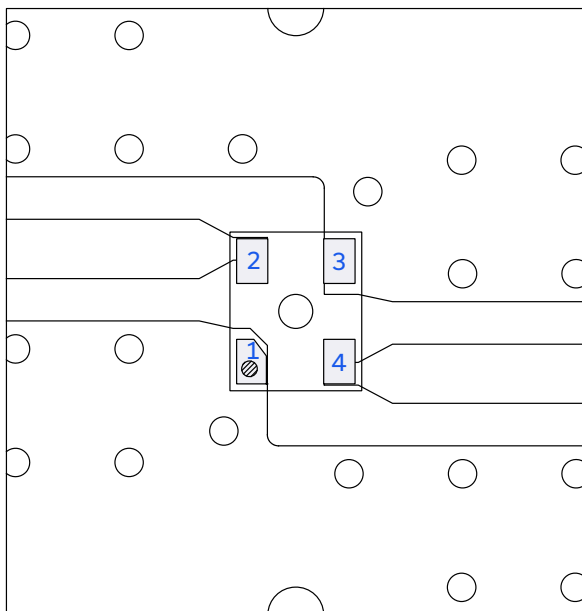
DUT soldered on Mini-Circuits Characterization Test Board: TB-TAV1-331NMC+
